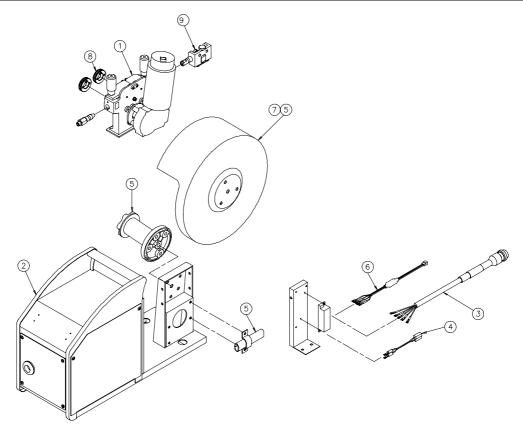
Exploded diagram of wire feeding unit (AFTF-4201)
